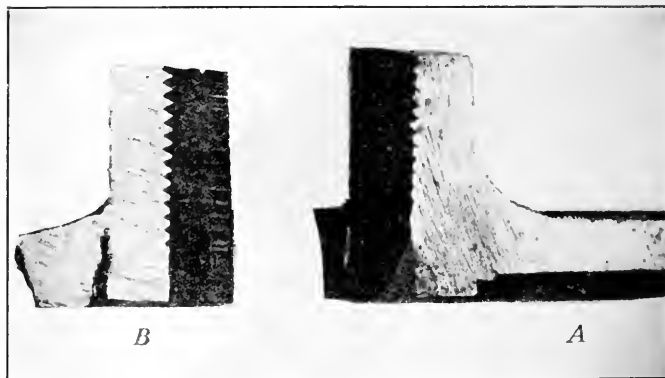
TWO PIPE-COUPLING SPECIMENS. B IS THE NIPPLE OF CYLINDER NO. 2 WHICH LEAKED THROUGH THE WELD. A IS SOUND NIPPLE WELDING THAT DID NOT LEAK; MAGNIFICATION 1.5
